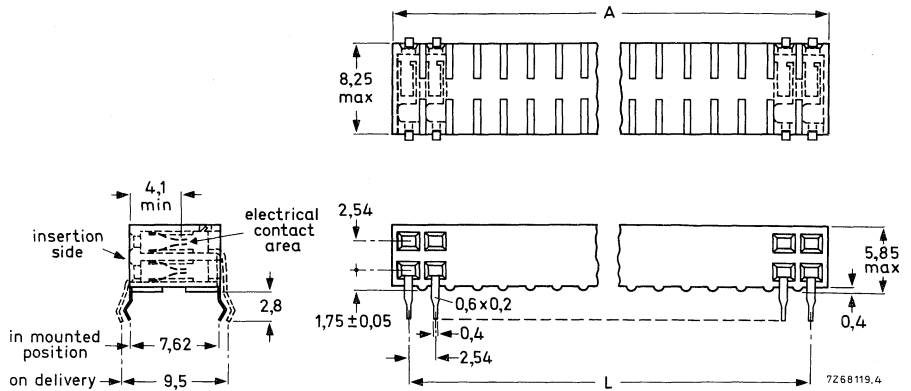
Board edge socket, double row. See Table 1 for dimensions A and L.
